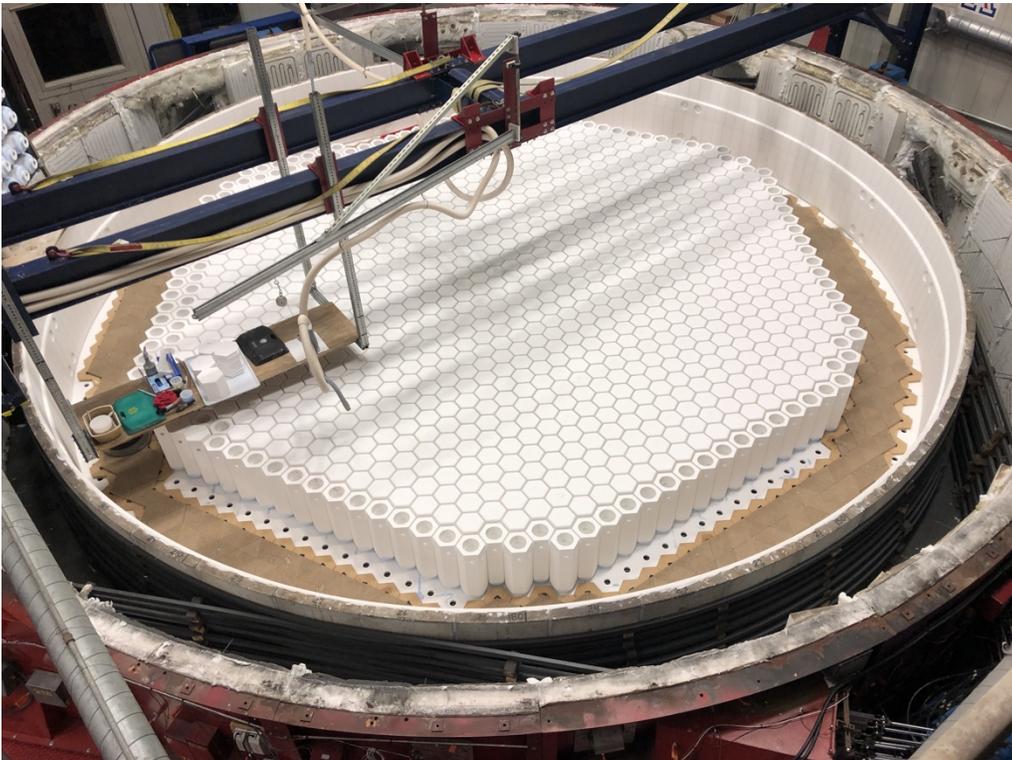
GMT segment S6 mold machining and assembly in the spin-casting furnace is now 2/3 completed.
